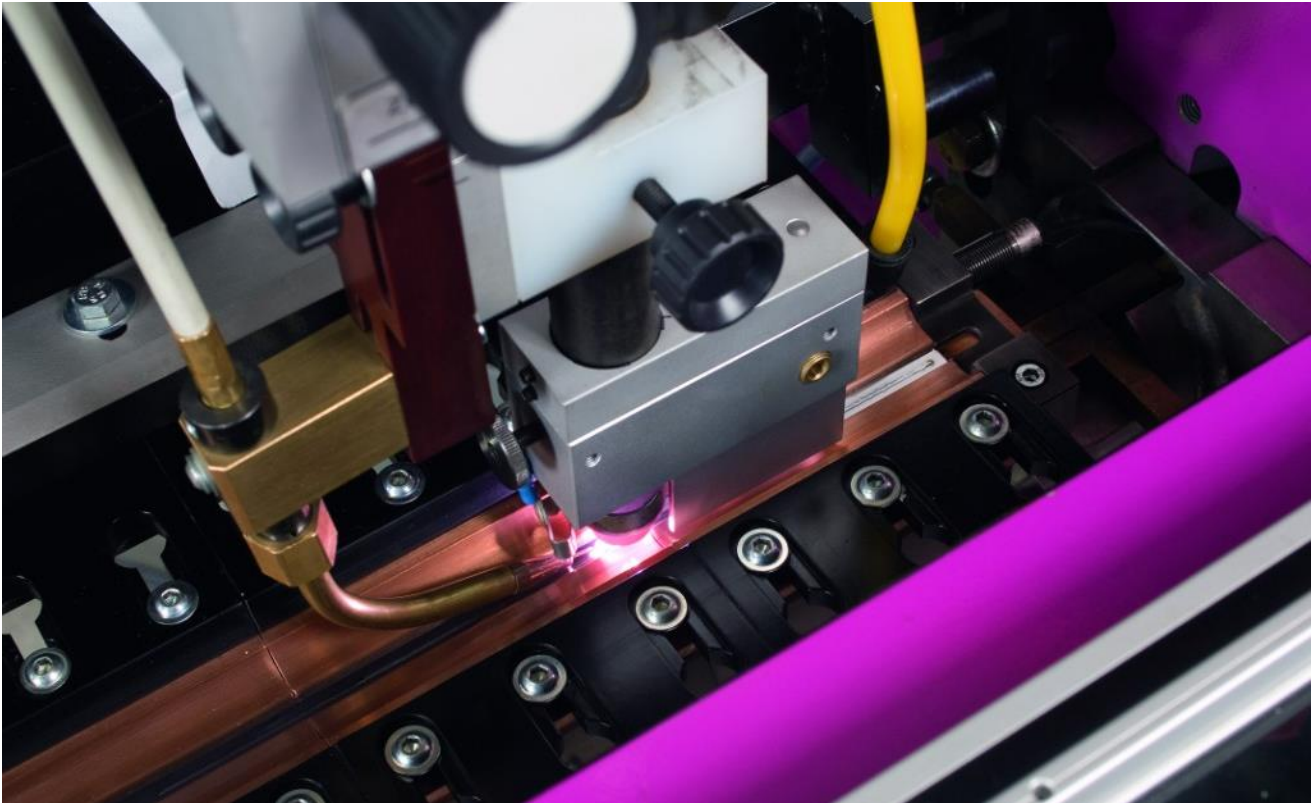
TIG / GTAW welding with trailing gas nozzle and coldwire feeding (Option)
